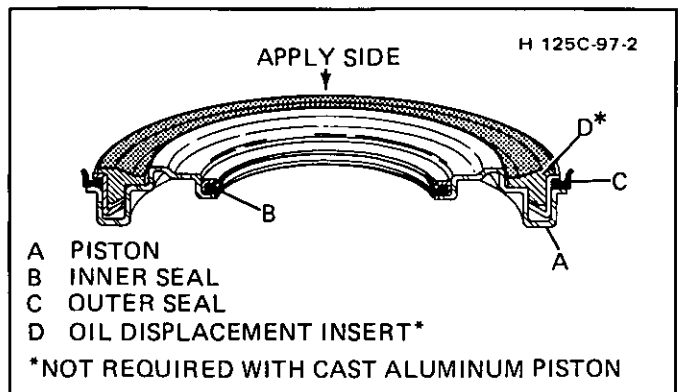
Typical Lo & Rev. Clutch Apply Piston
